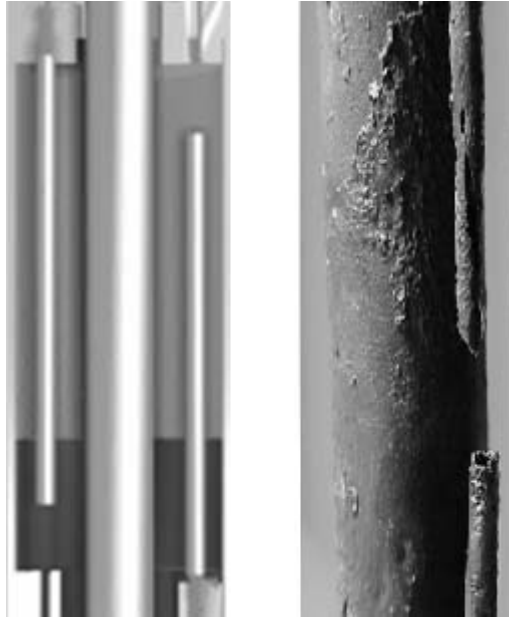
New Seal tube assembly (left) and Corroded Seal Tube (right)
